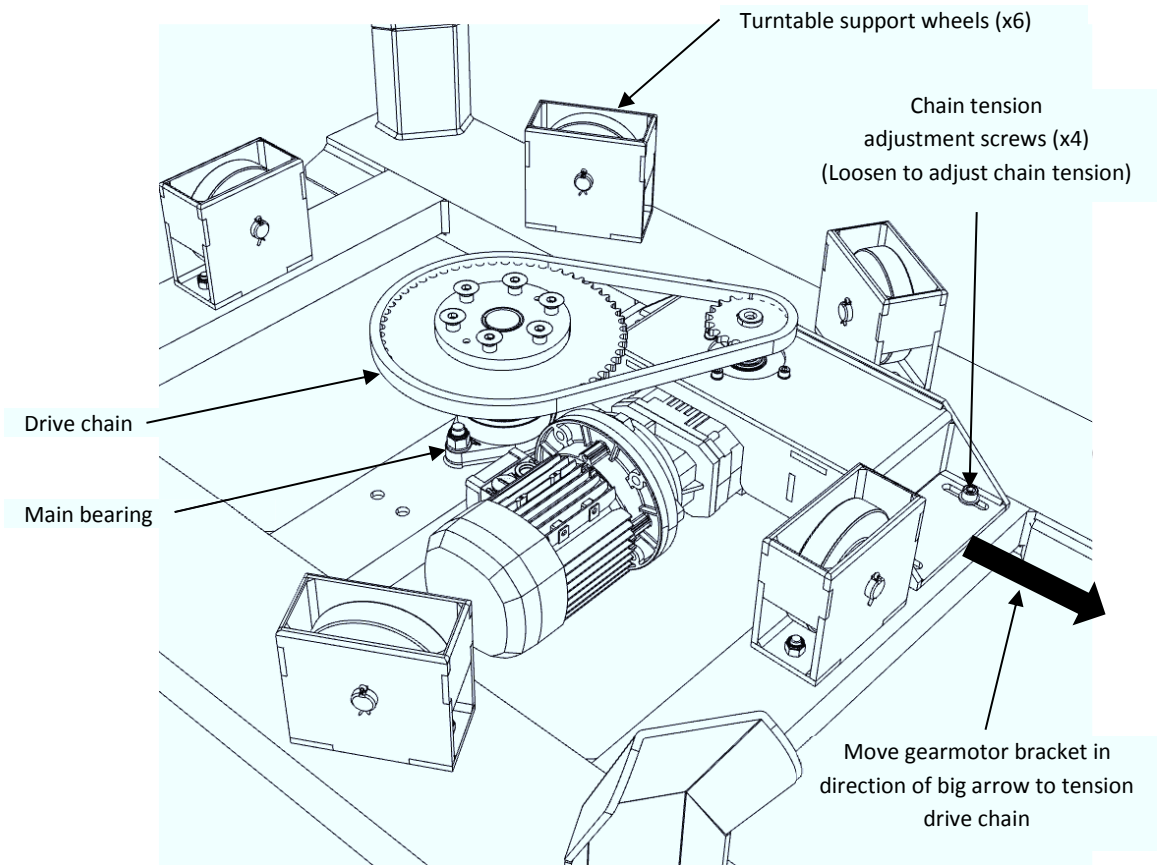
Decoiler maintenance (Top plate removed for clarity)
